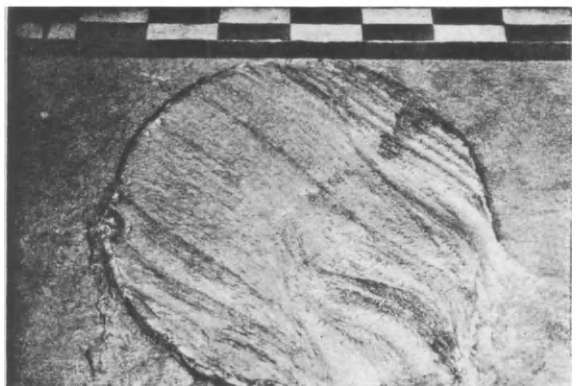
Squeezer plate for a large diecasting machine. Gross yield 93%.
